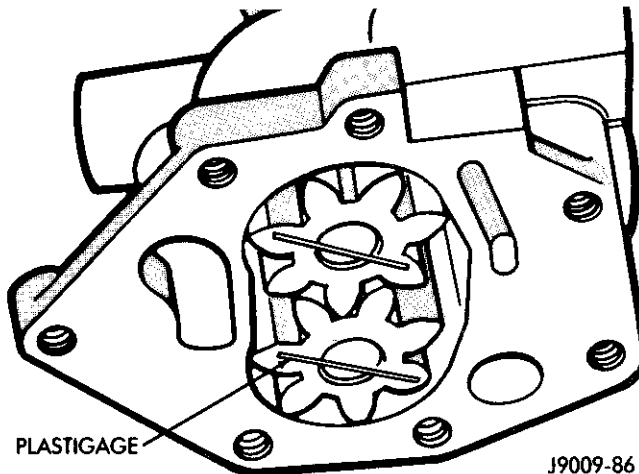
Oil Pump Gear End Clearance Measurement — Plastigage Method
